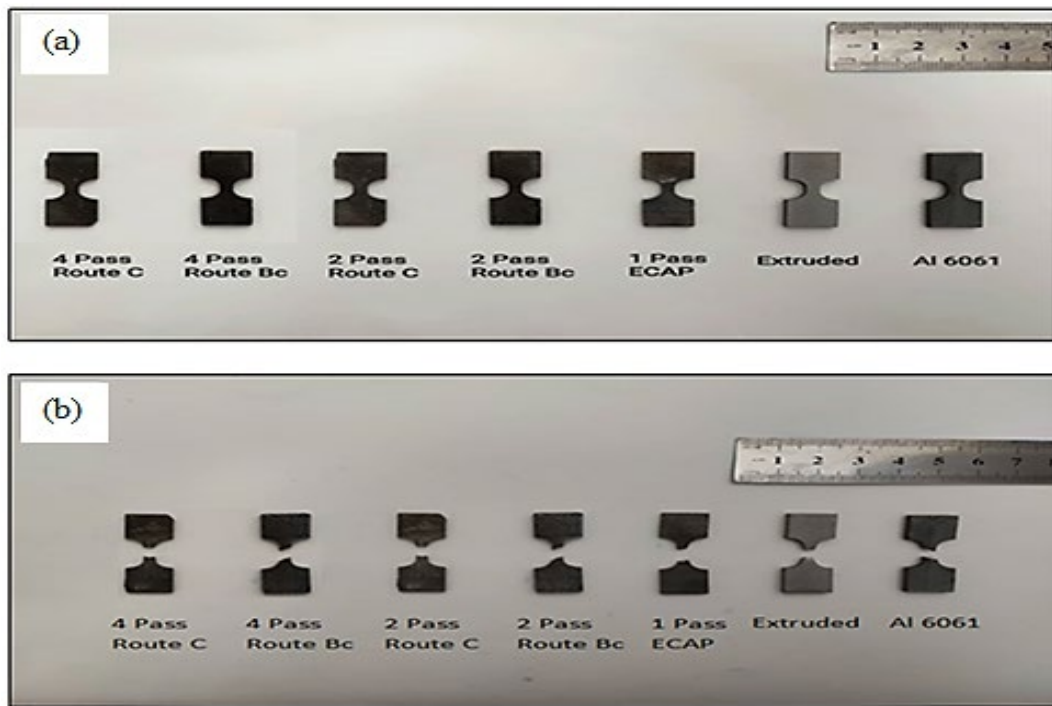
Representation of tensile specimens (a) specimens before tensile testing (b) specimens after tensile examination
